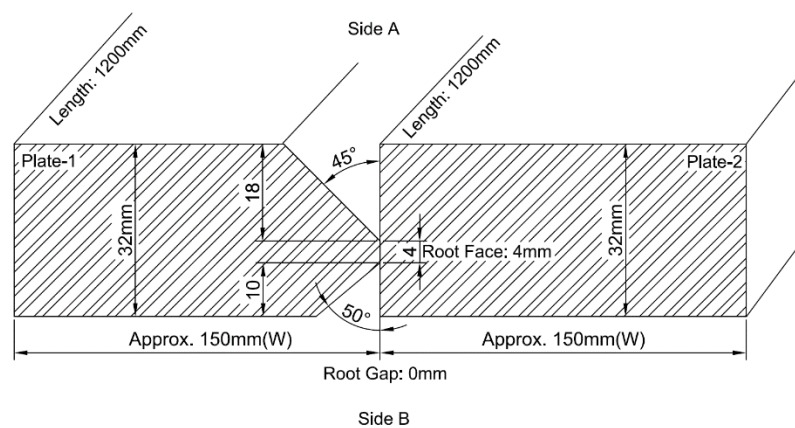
(a) K-Type Groove weld joint design for Steel L.
